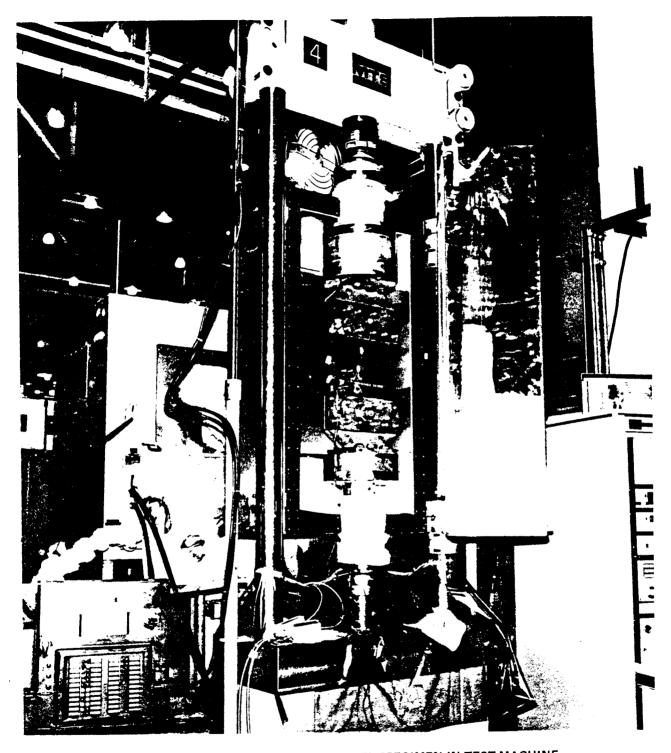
Z3943443 CENTER SLIT PANEL SPECIMEN IN TEST MACHINE
